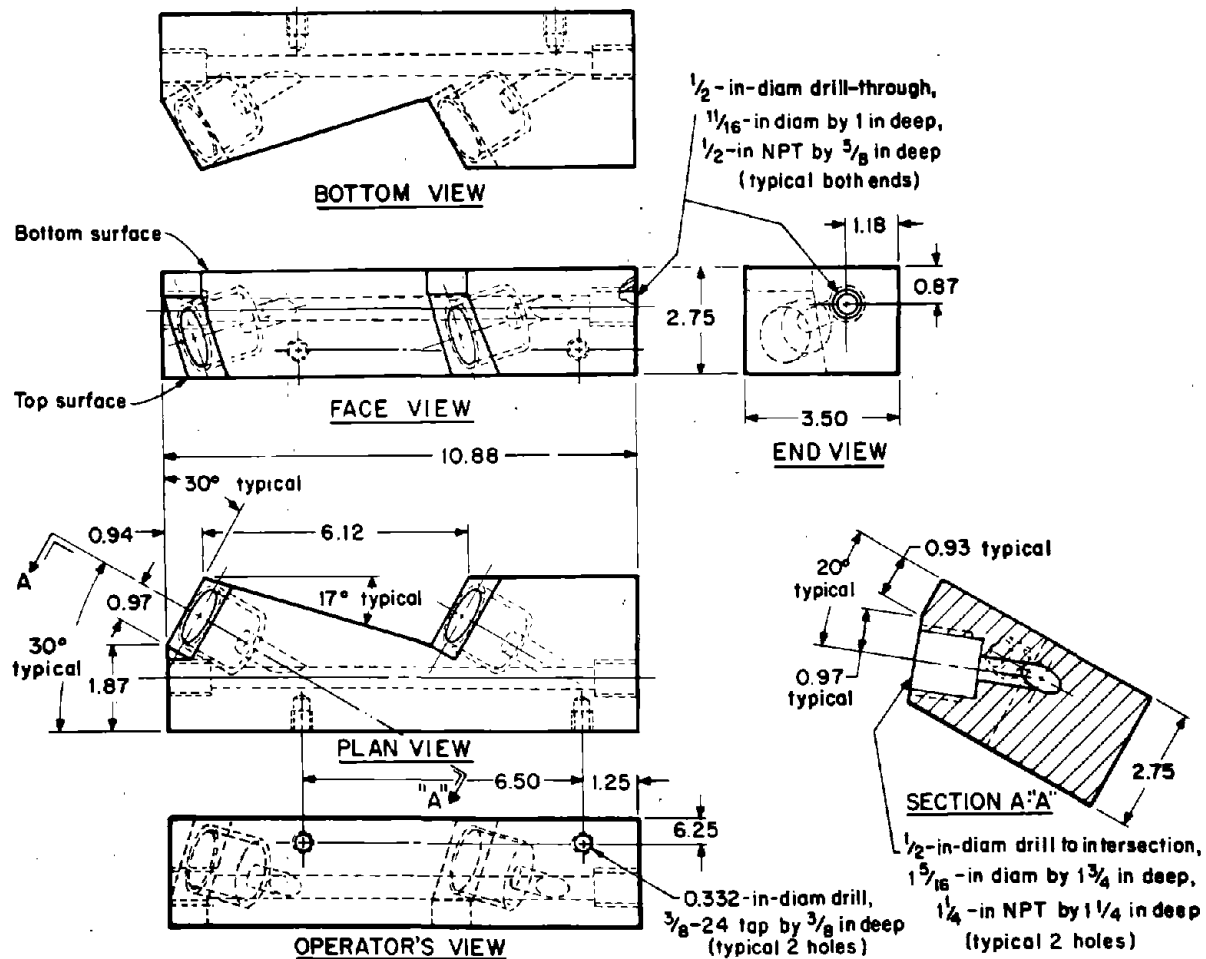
Water spray manifold 6. All dimensions are in inches.
